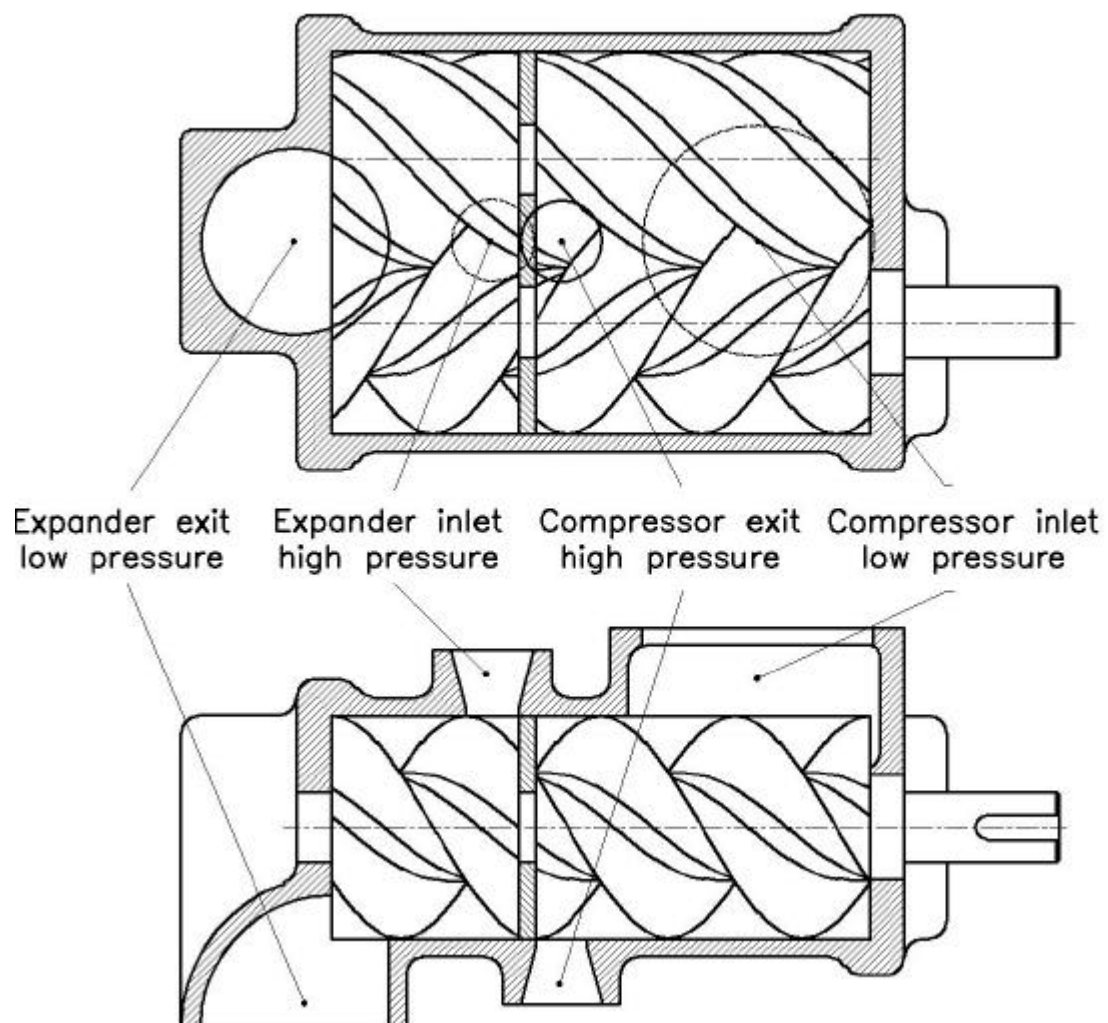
Compressor – Expander with balanced rotors, Stosic, 2002
